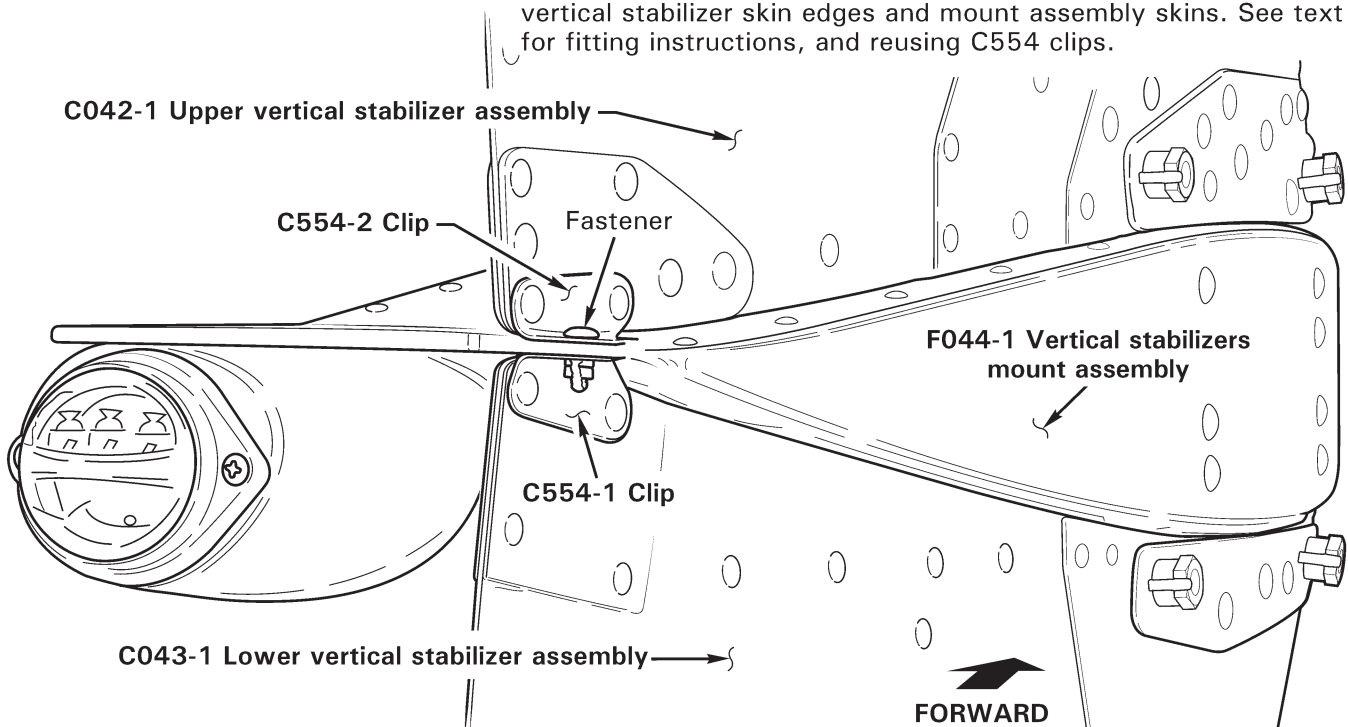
F004-2 EMPENNAGE ASSEMBLY – TAILCONE ASSEMBLY AFT BULKHEAD
